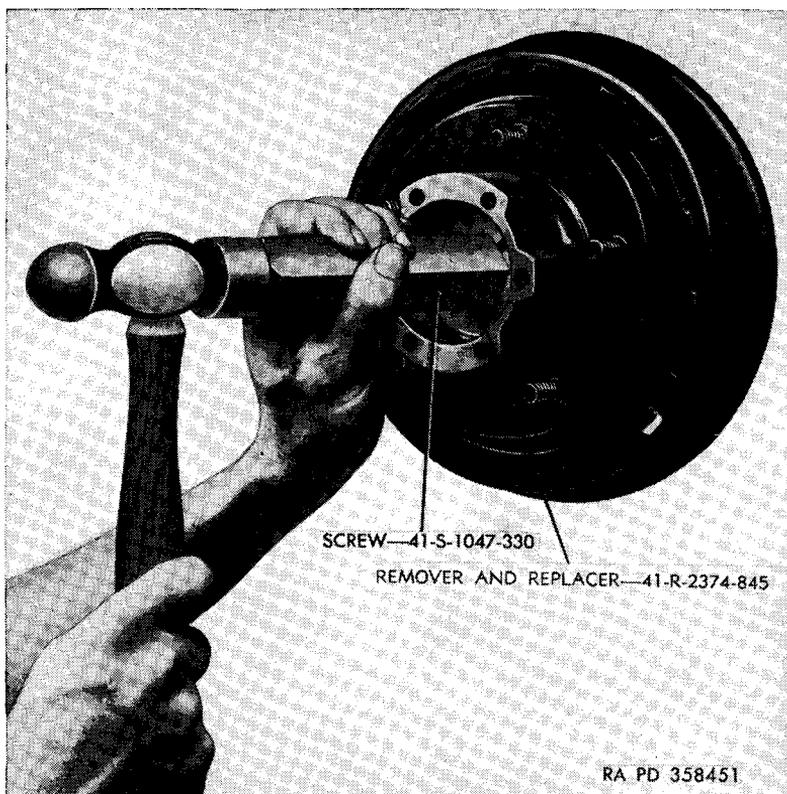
Installing front wheel outer bearing cup with replacer 41-R-2374-845
